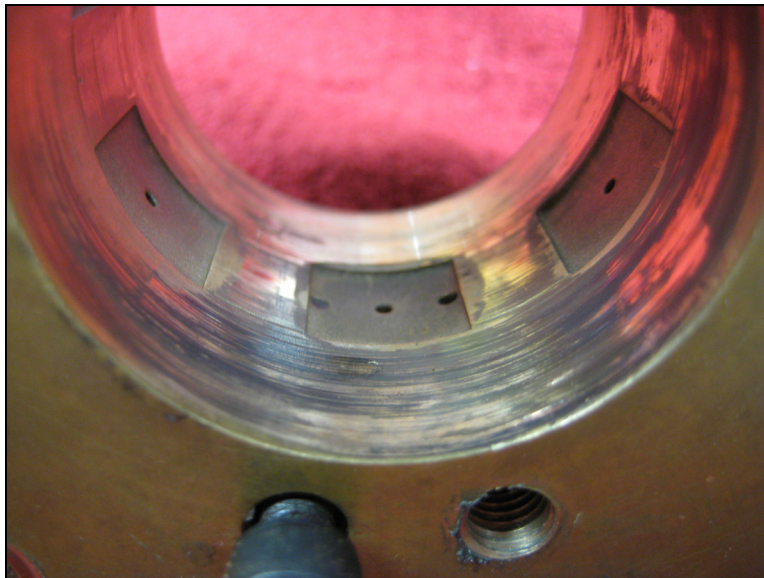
Burnishing of the bearing with applied unit load LOR direction
